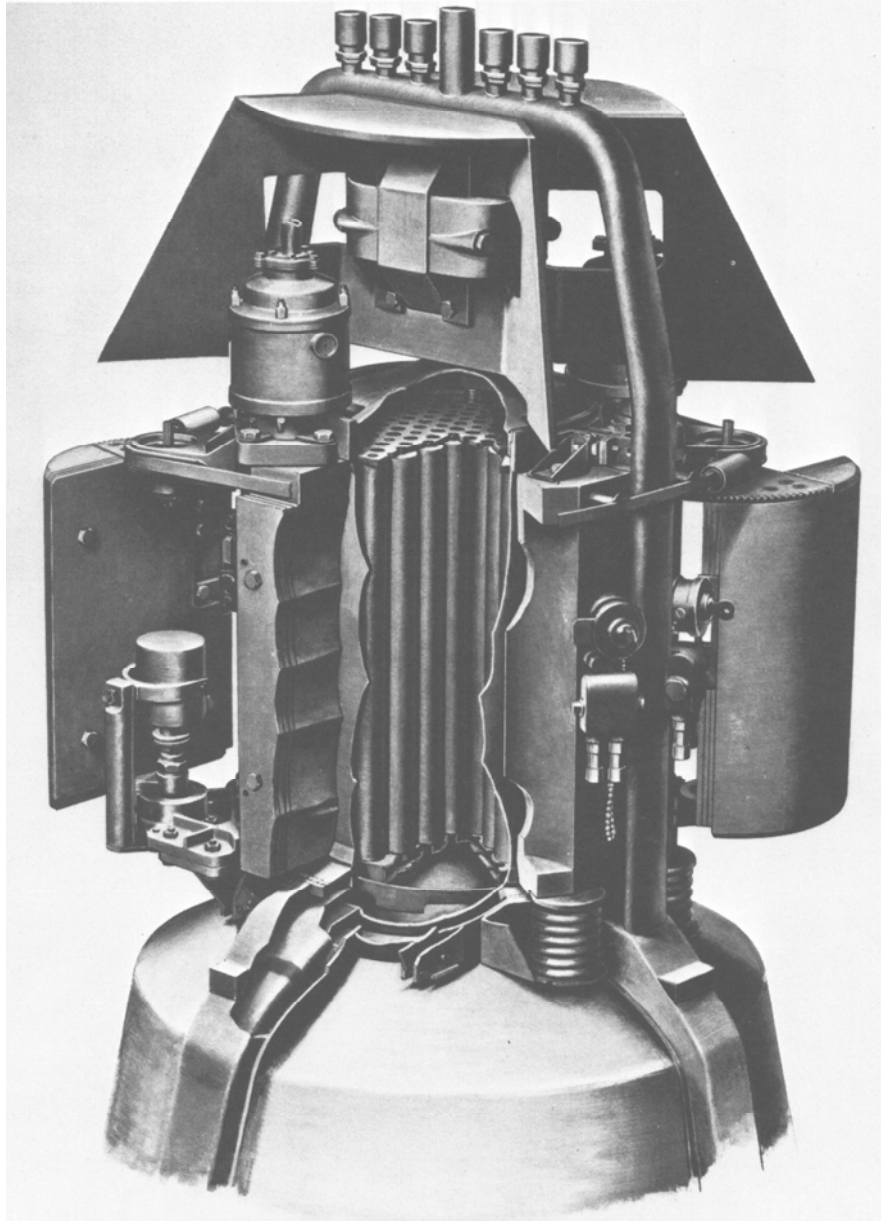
Photograph of the external beryllium reflector assembly.
